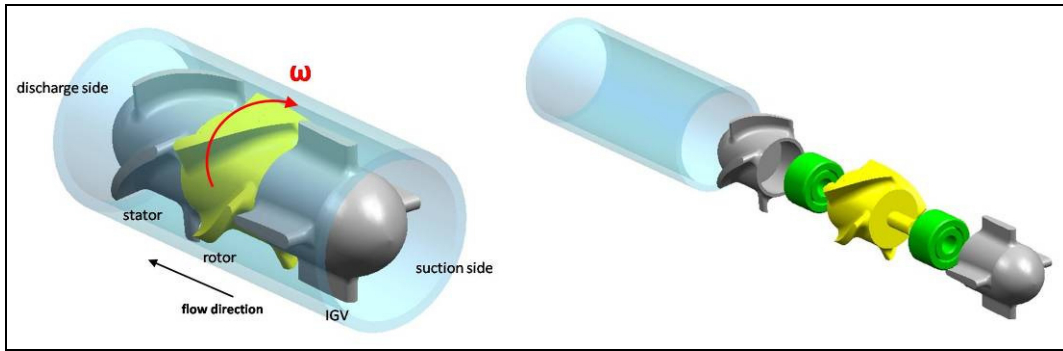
CAD Model of Experimental Axial Flow Pump with Exploded View.
